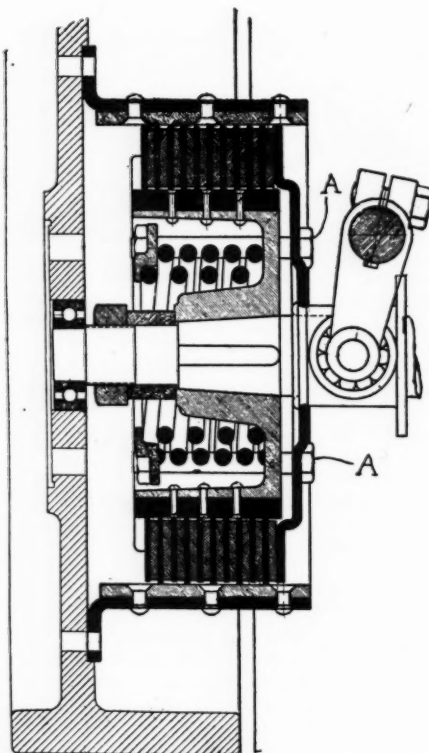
Sectional view of Pathfinder clutch, showing nuts which must be tightened to prevent slipping
